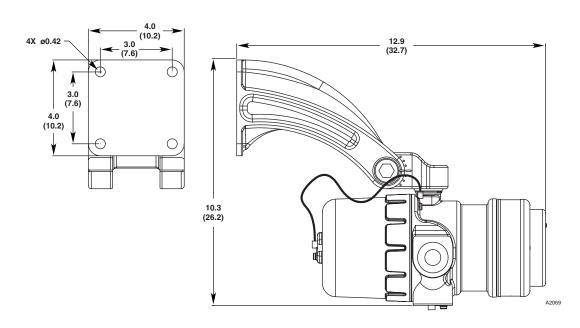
Q9033B Mounting Bracket Dimensions in Inches (cm) (Refer to Figure 1 for Correct Detector Orientation)
